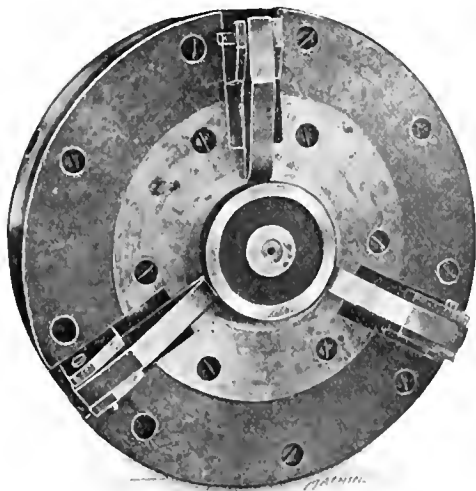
A Chuck for Facing Gear Blanks, which holds them without Side Strain or Distortion.
